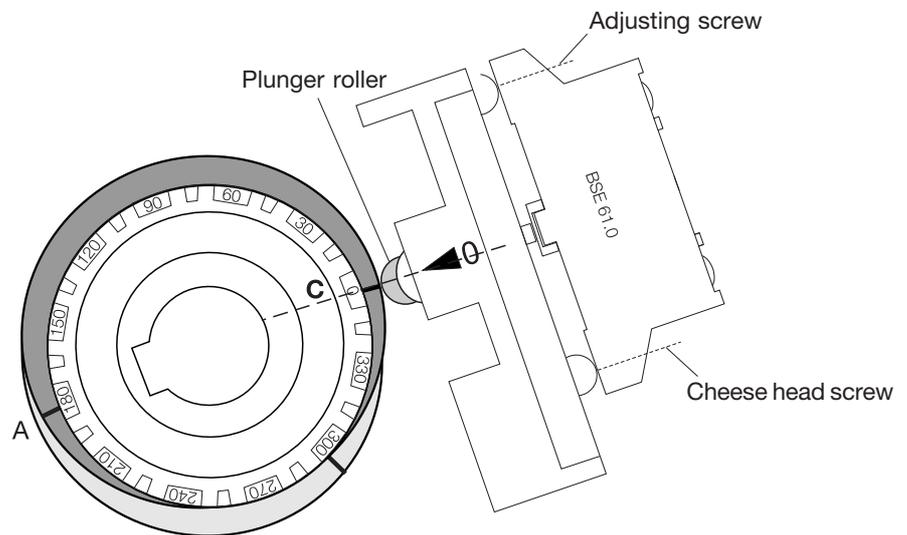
Replacing and adjusting the switch element using the example of a BSE 61, switch-off point at notch C
